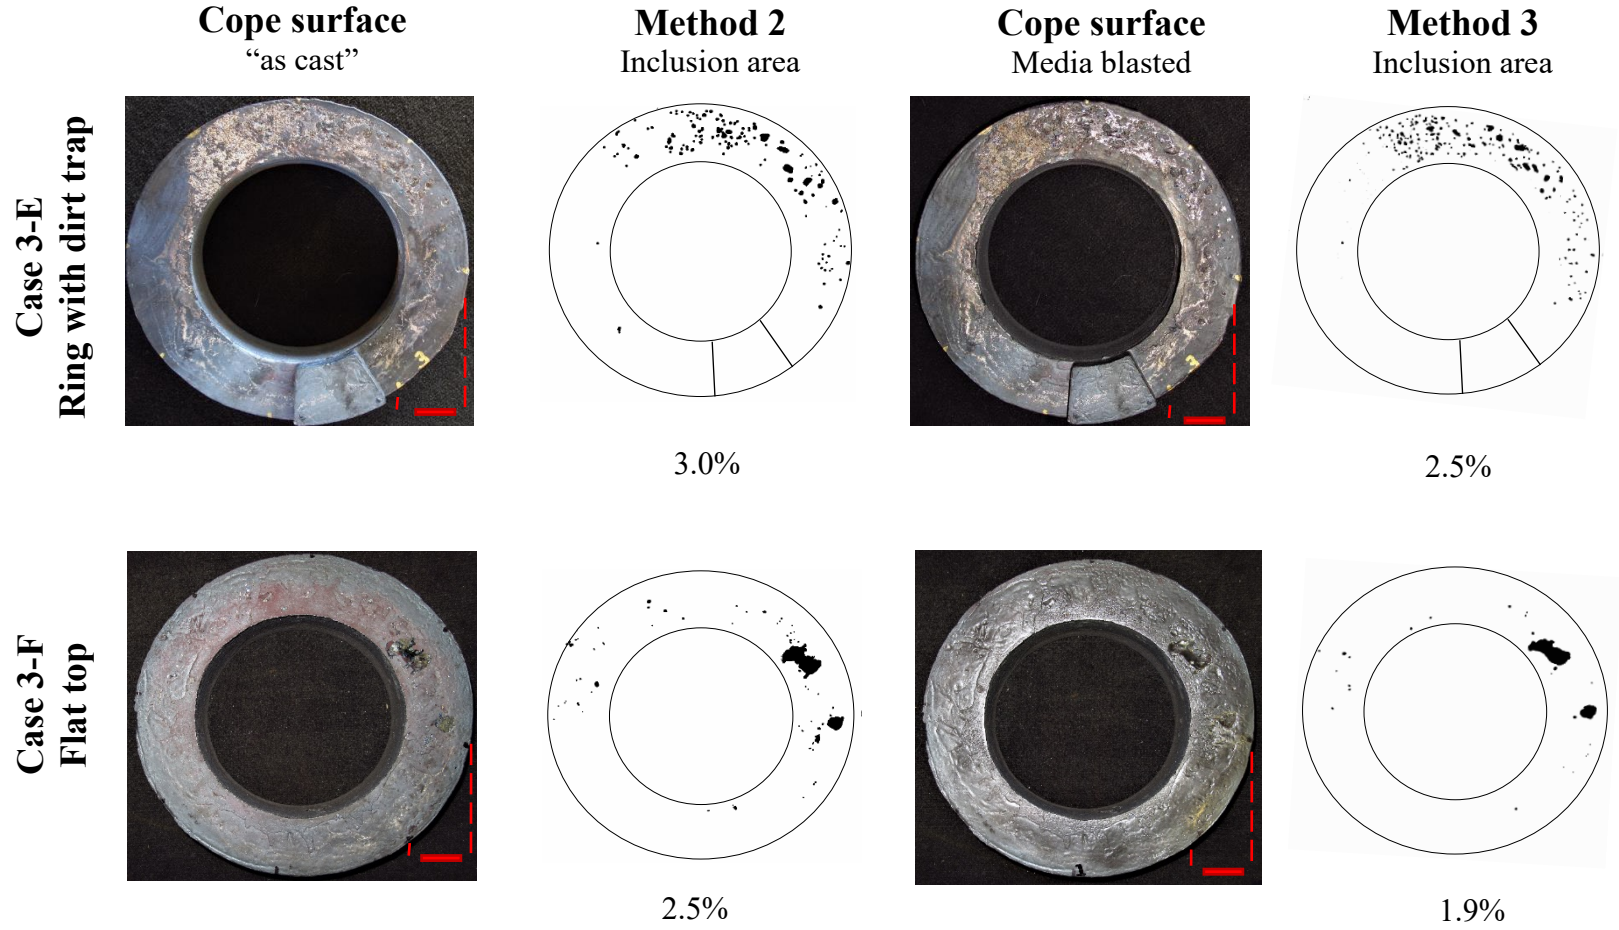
Images of casting surfaces and measurement results for ring casting cases using Methods 2 and 3 from heat 3.
